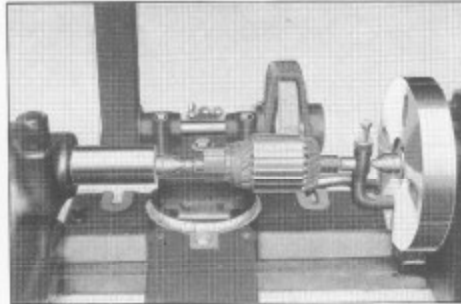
Truing outside diameter of armature by grinding in the lathe.
